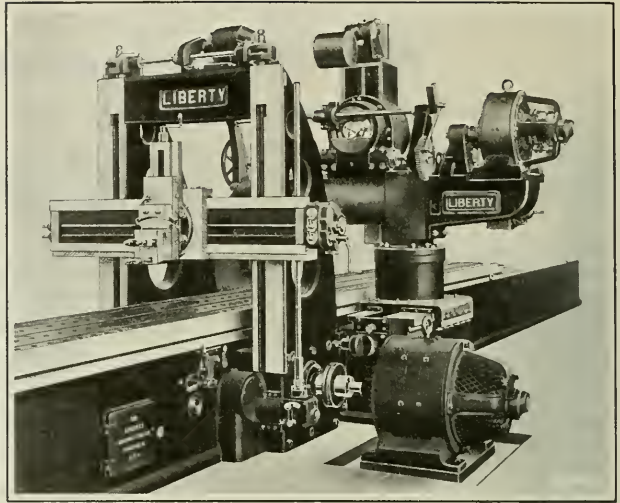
Close-up View showing Front of Planer Unit and Back of Slotter Unit
